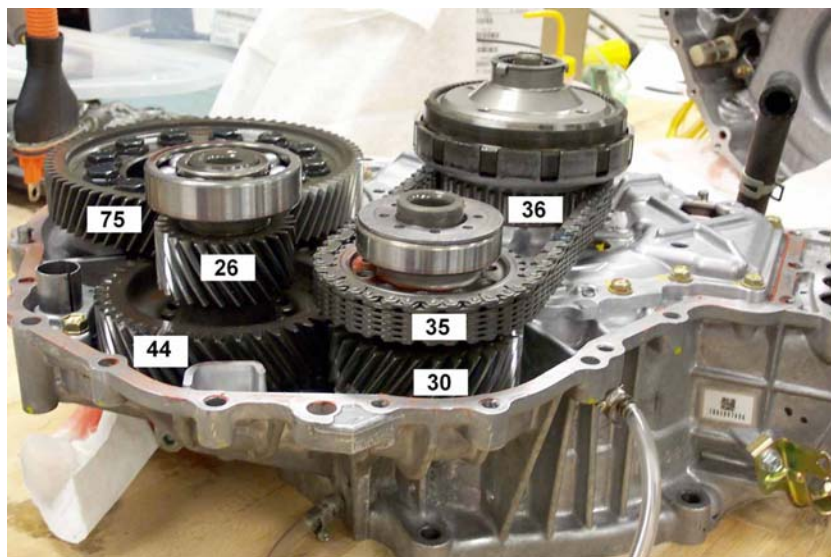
2004 Prius gears with number of gear teeth shown.
